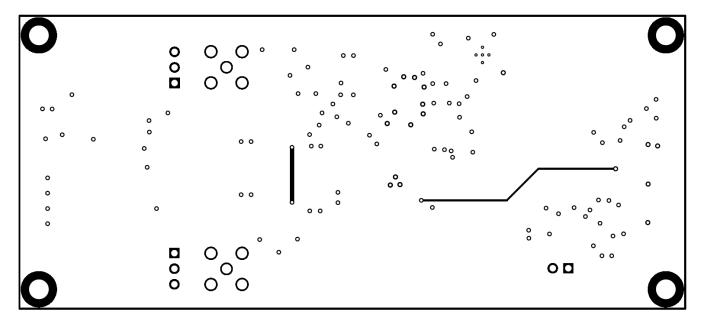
ADS8881EVMV2 PCB Layer 4: Bottom Layer
